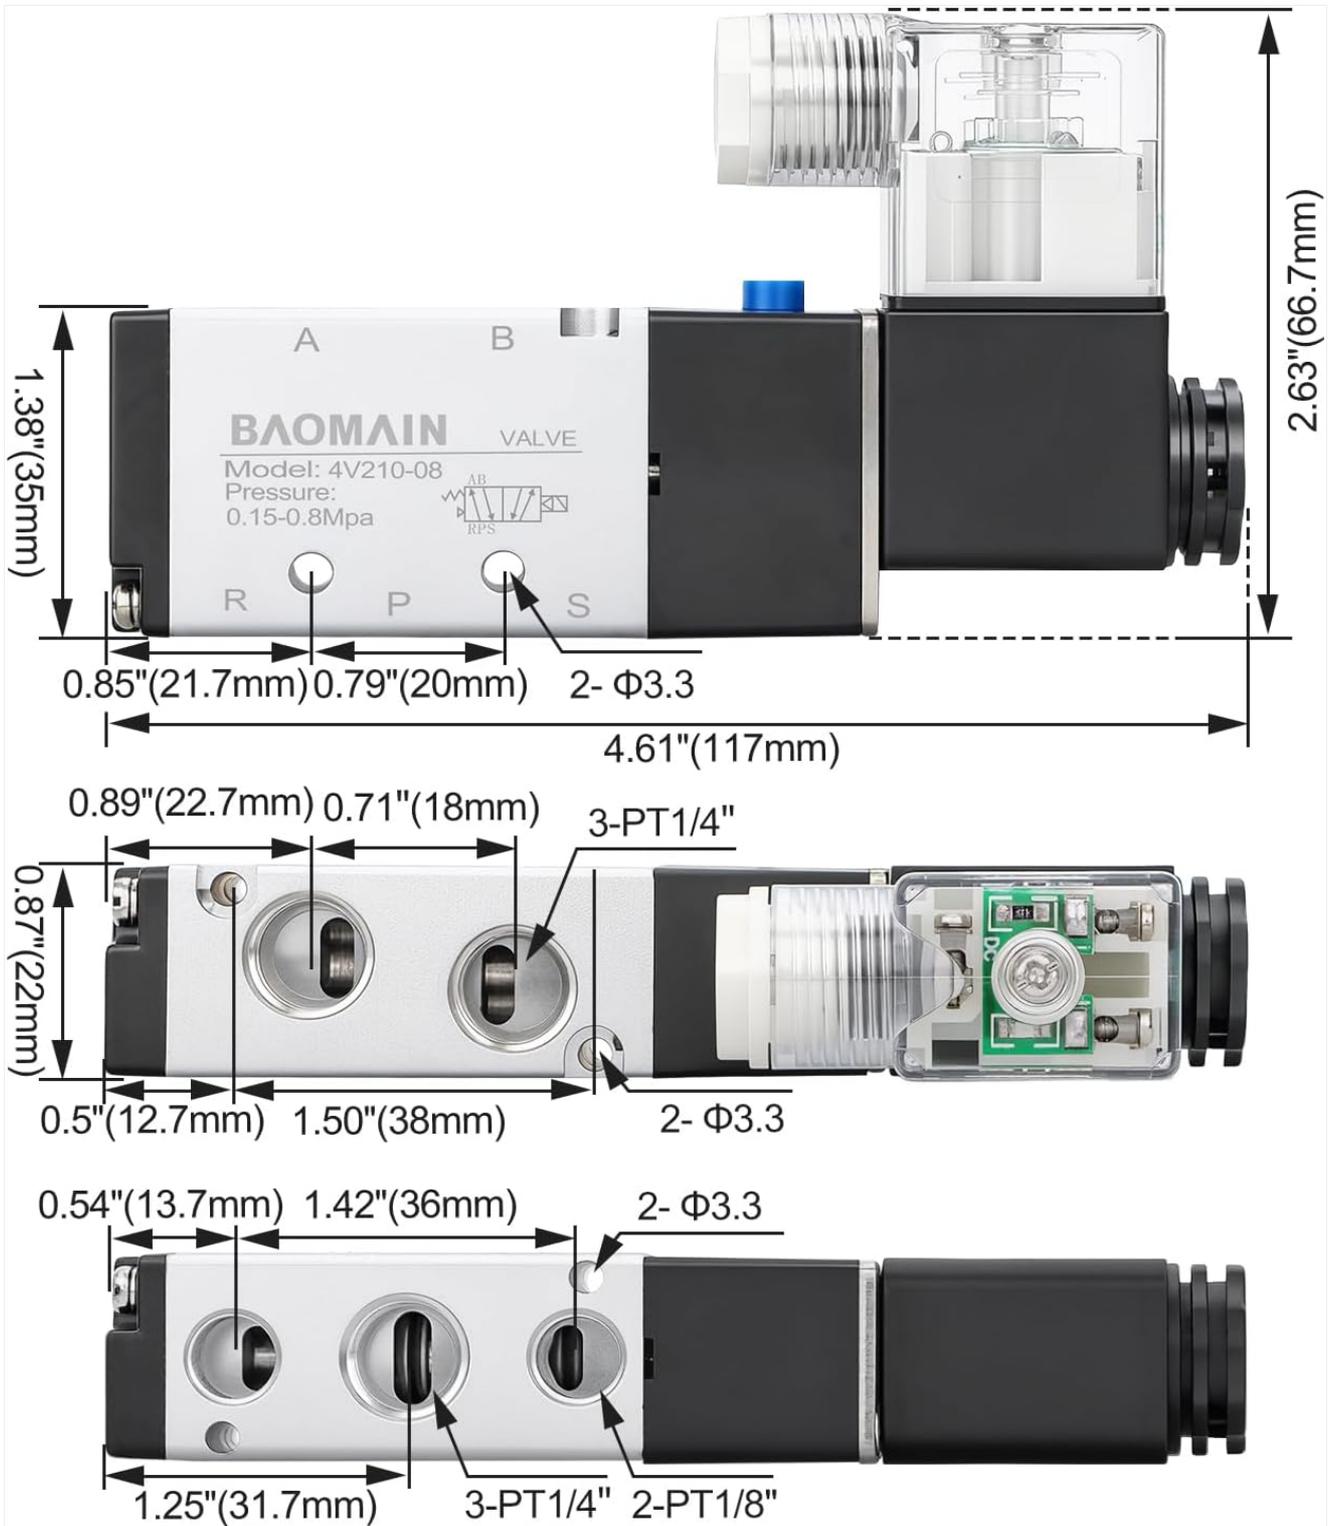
Dimensional Drawing. This image provides detailed measurements of the solenoid valve in both inches and millimeters.
